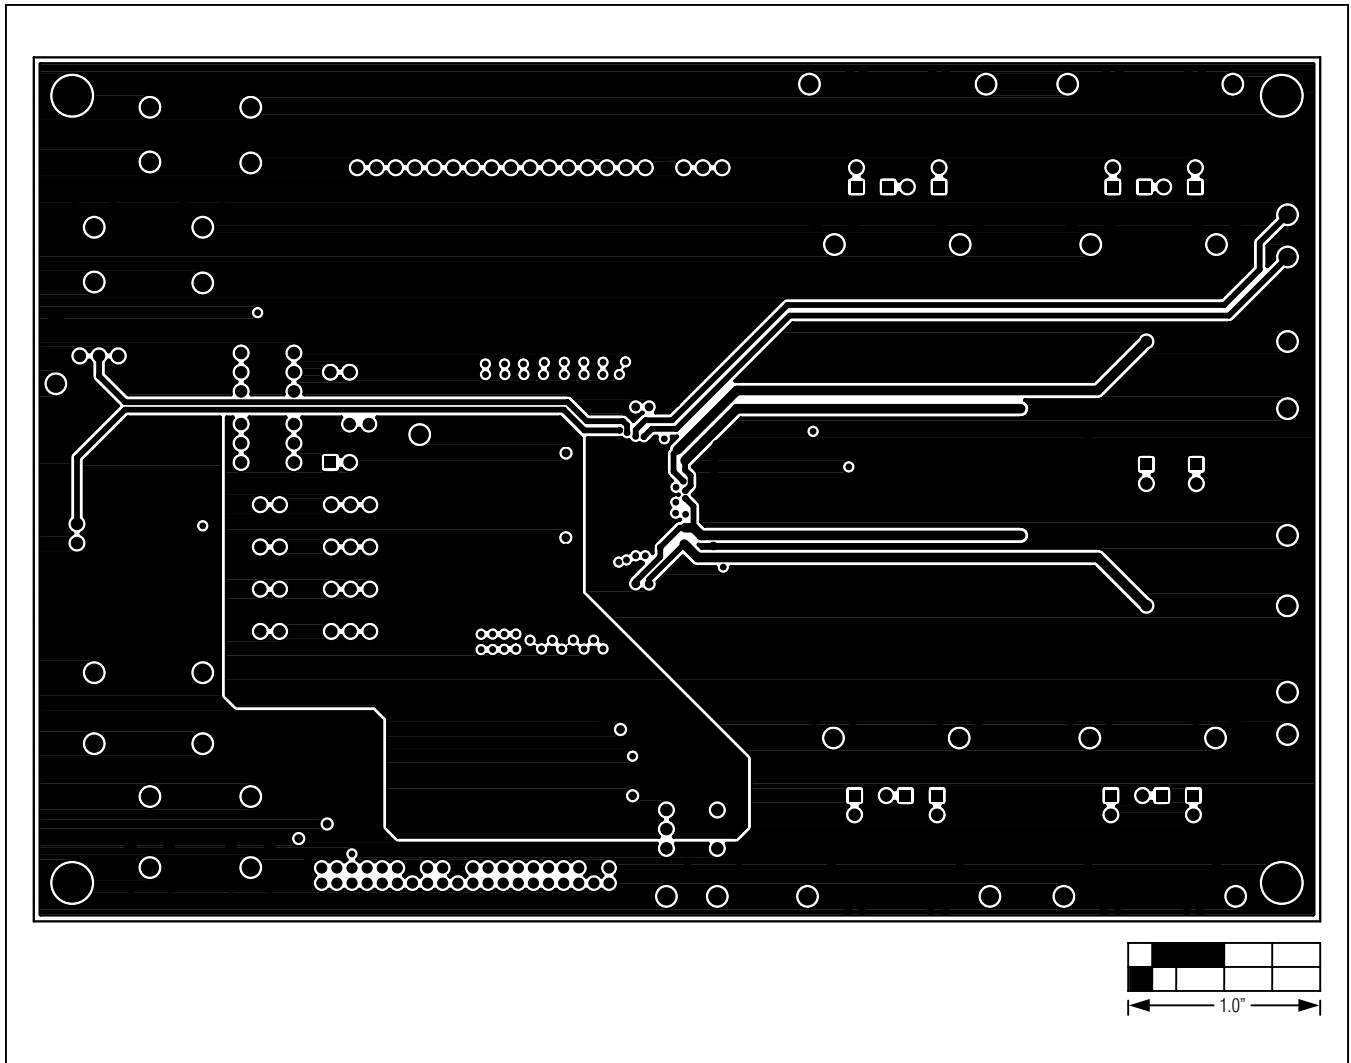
MAX14808 EV Kit PCB Layout—Layer 3 (Power)
